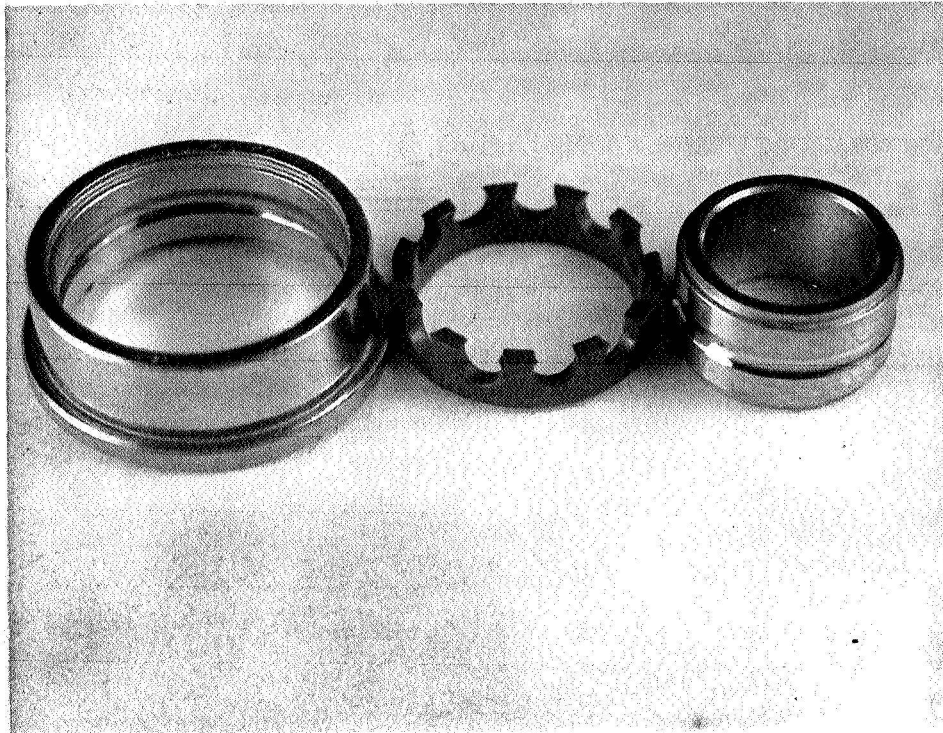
Self-Lubricating One-Piece Ball Separator/Retainer Used in Precision Instrument Bearing
